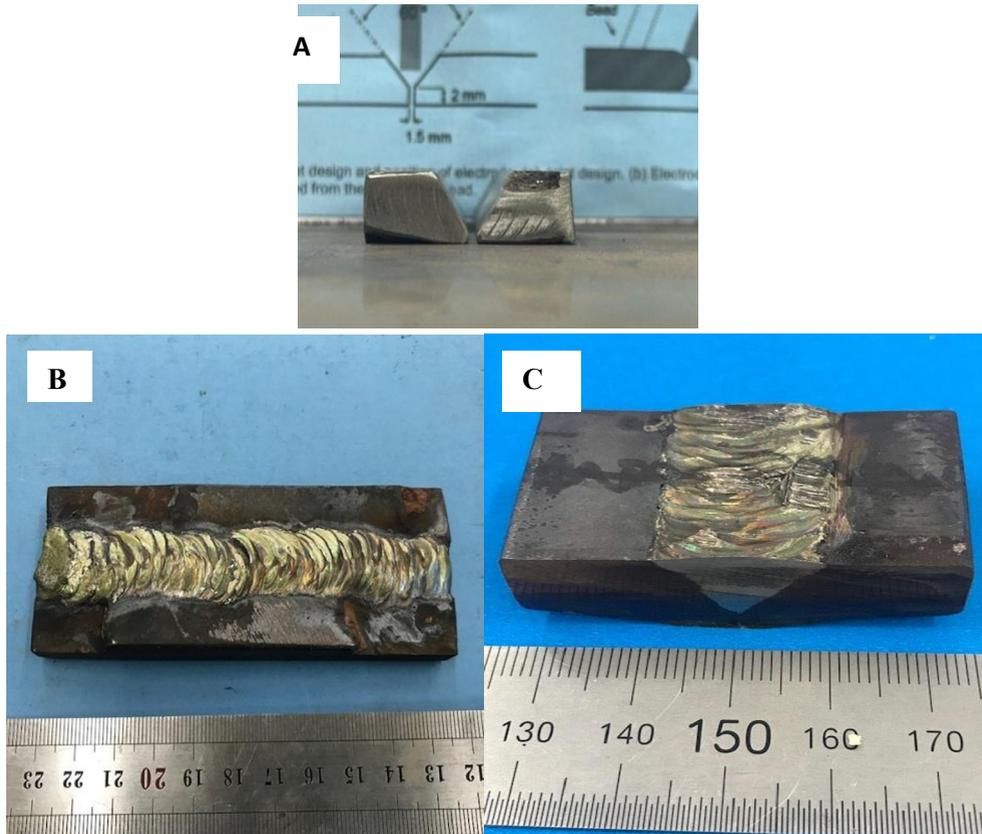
Pictures of the welding process used for the ADI blocks when using Ni-Cr-Cu alloys as electrodes.
